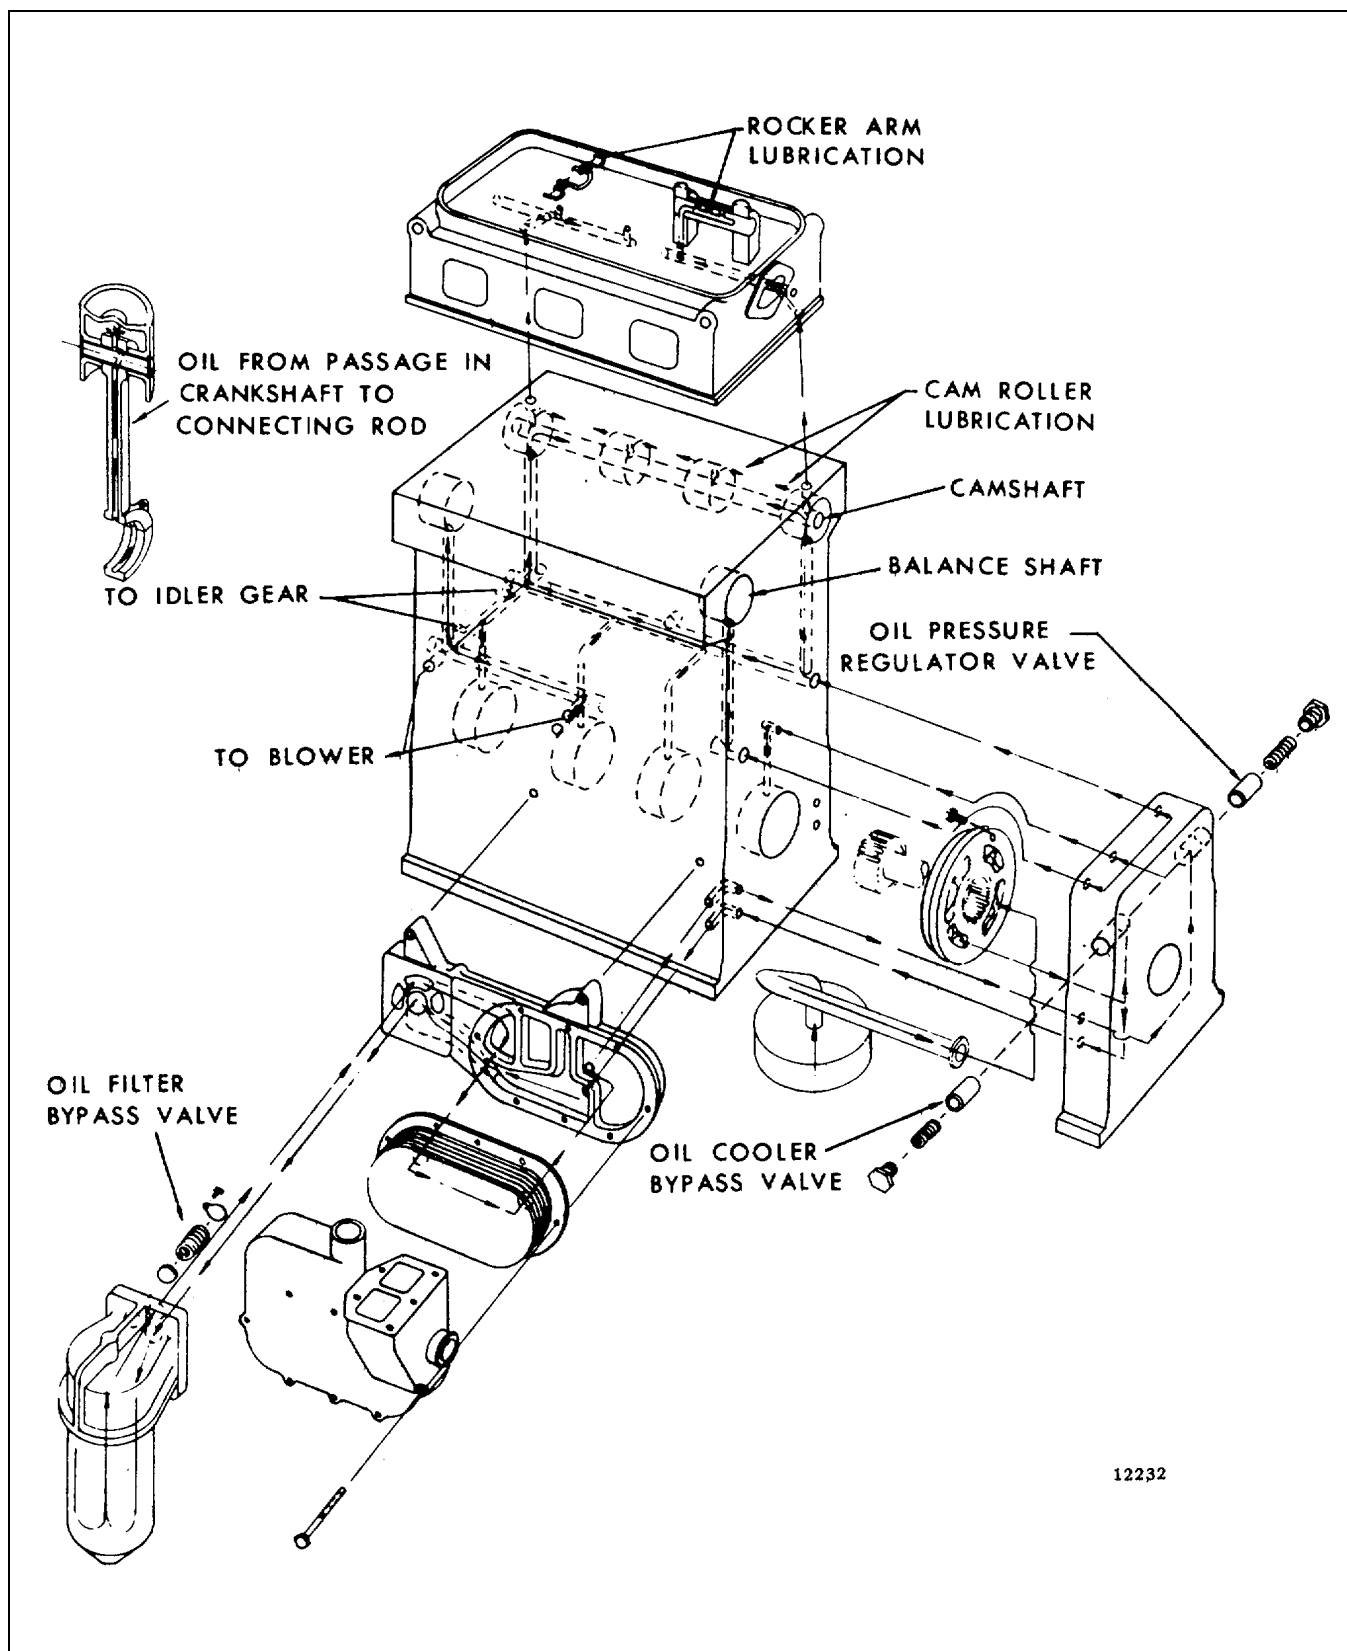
Schematic Diagram of Typical In-Line Engine Lubricating System
